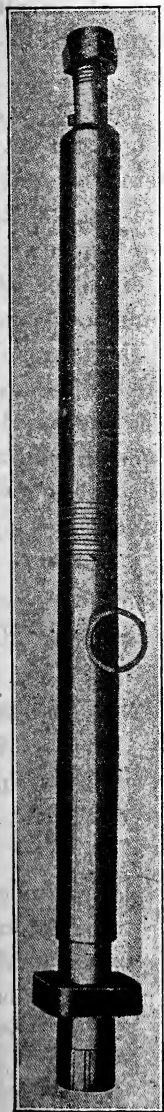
PISTON ROD OF DU BOIS GAS ENGINE
